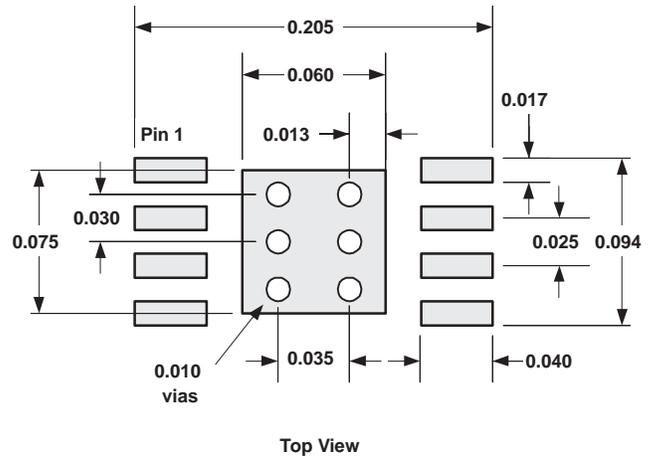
DGN PowerPAD PCB Etch and Via Pattern
